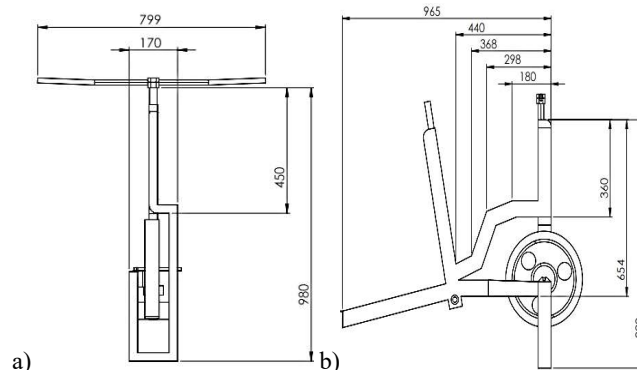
Sketch of multi station training tool for static bike, a) front view and b) side view
